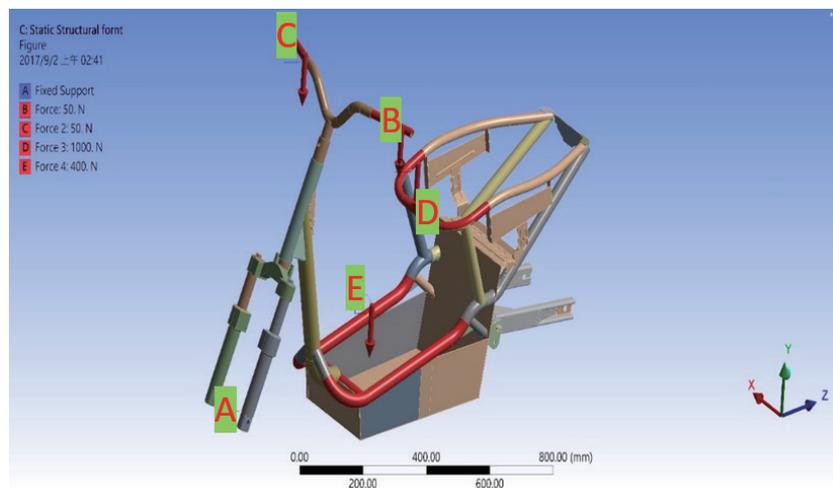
(Color online) Boundary condition when front and rear wheel axles were constrained.
